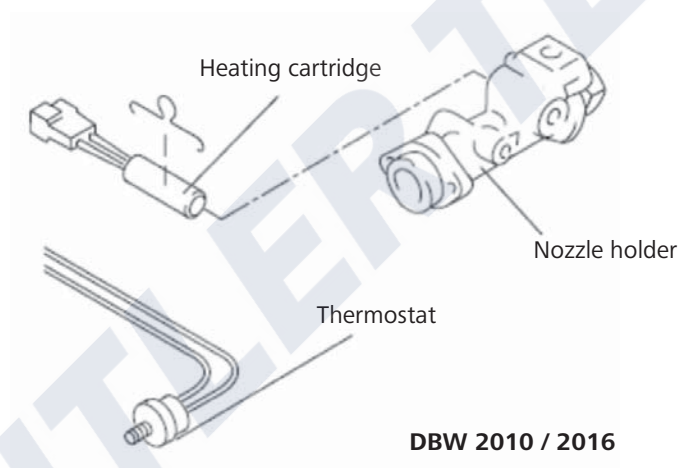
Installing nozzle holder pre-heating unit with 1553 control unit
